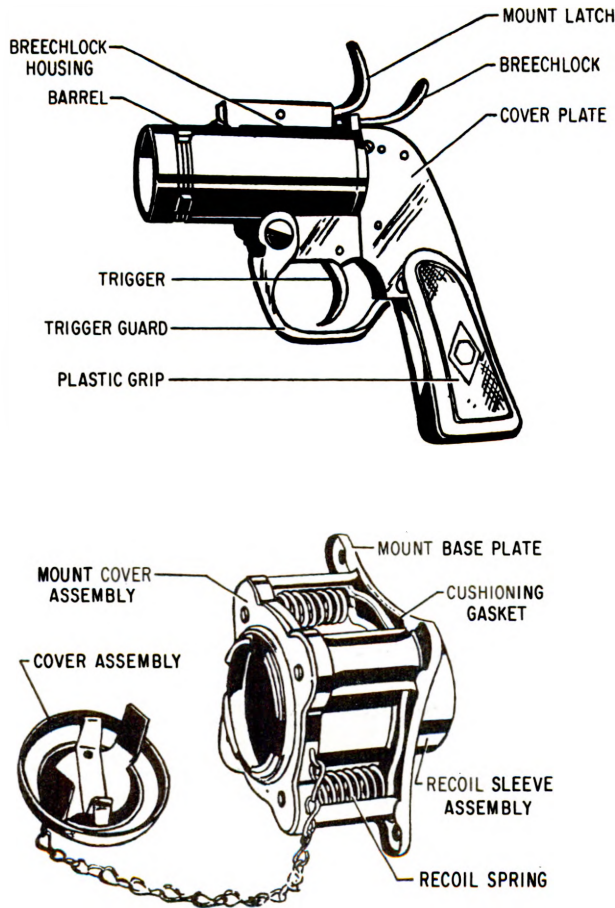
Pyrotechnic Pistol AN-M8 and Mount M1
